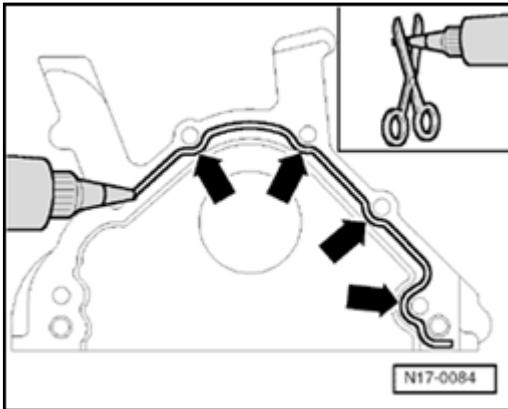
Cutting Off Tube Nozzle At Front Marking & Applying Silicone Sealing Compound To Clean Sealing Surface Of Sealing Flange
